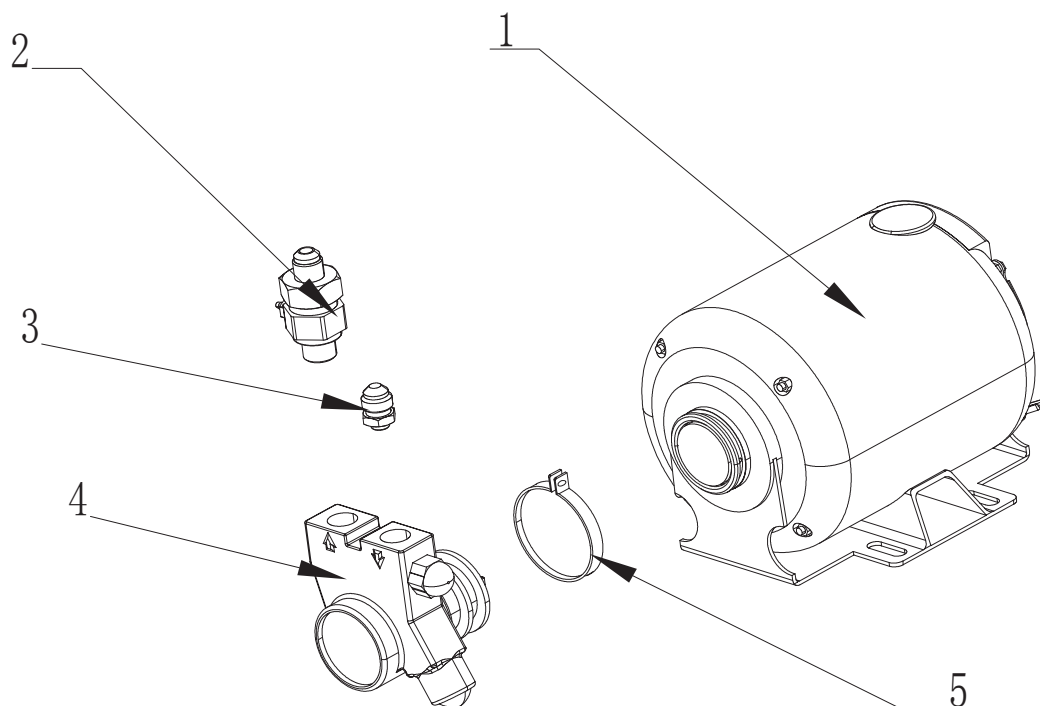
PUMP AND MOTOR ASSEMBLY
